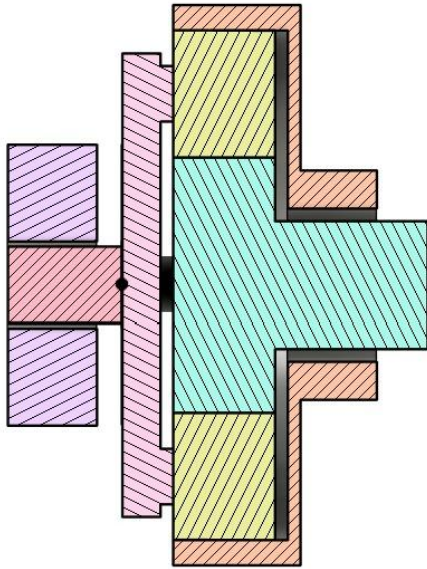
Planetary gear configuration with motor connected to the carrier.
